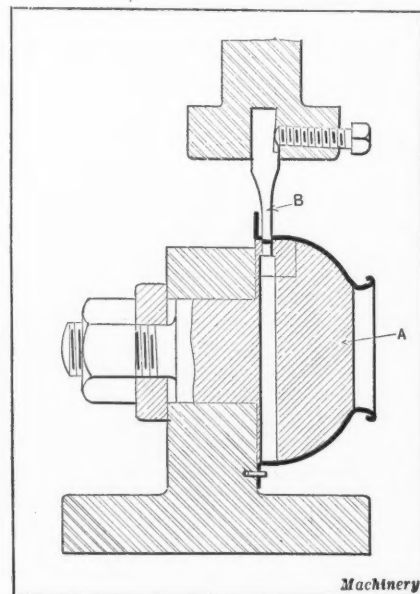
Piercing Two Small Holes in the Body close to the Flange
